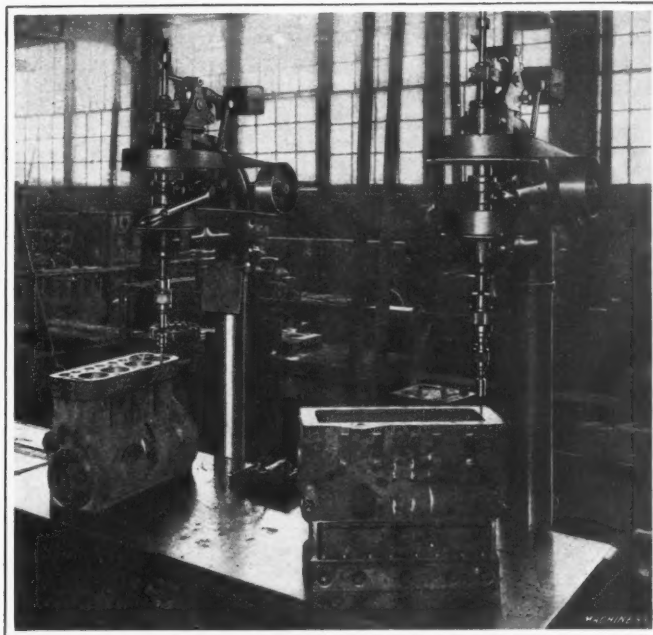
Garvin No. 2 Automatic Tapping Machines equipped with a Single Table to facilitate handling Work in tapping Fourteen Holes in Top and Seventeen Holes in Bottom of Cylinder Blocks
